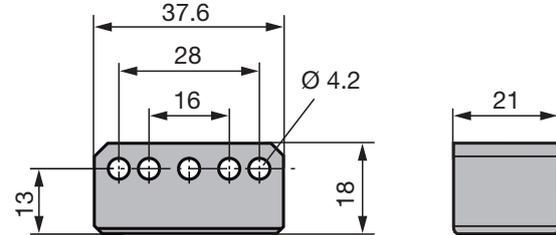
Installation dimensions of BTL6-A-3801-2 magnet
